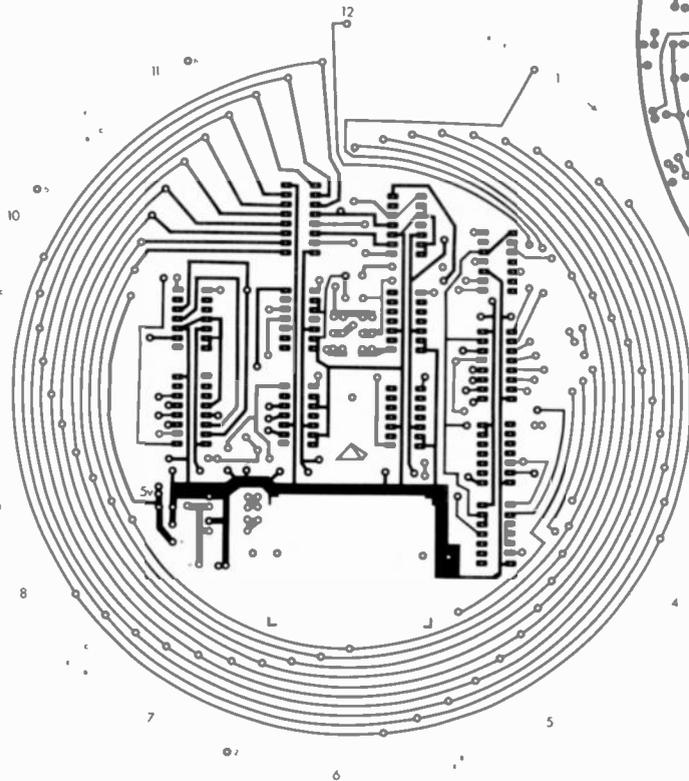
FRONT FOIL PATTERN of double-sided PC board shown half size.
